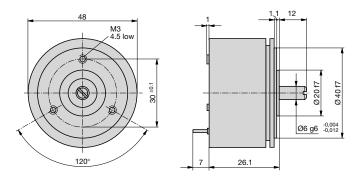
KINAX 3W2 with shaft dia. 6 mm, length 12 mm.
